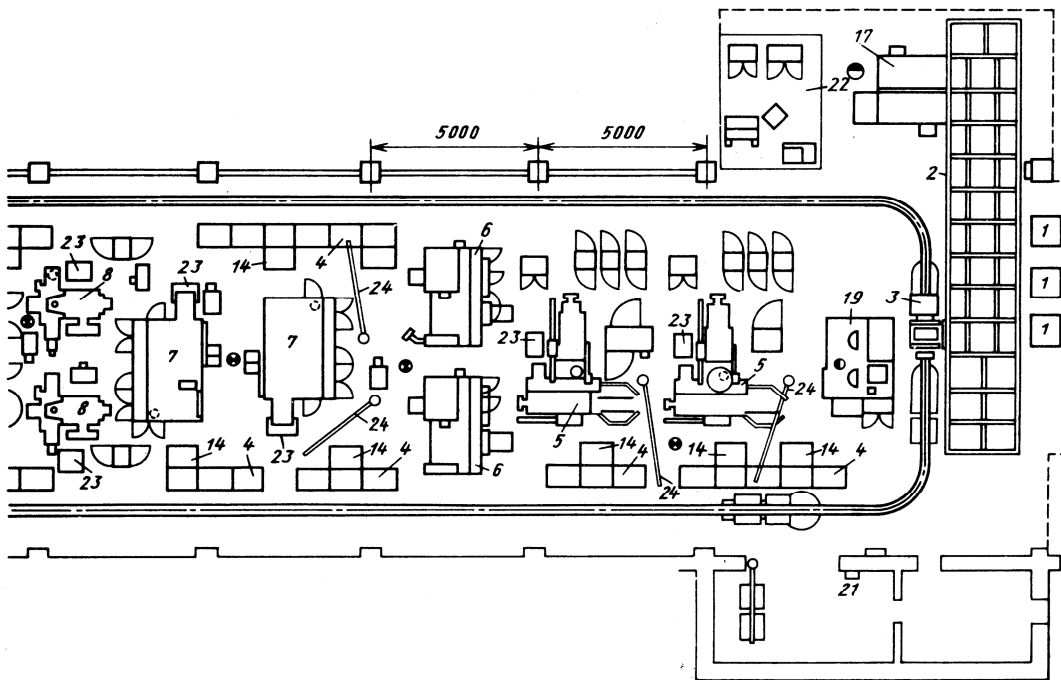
A layout of ACB-201 flexible manufacturing system for producing case parts in small-scale and medium size production (on the right)
